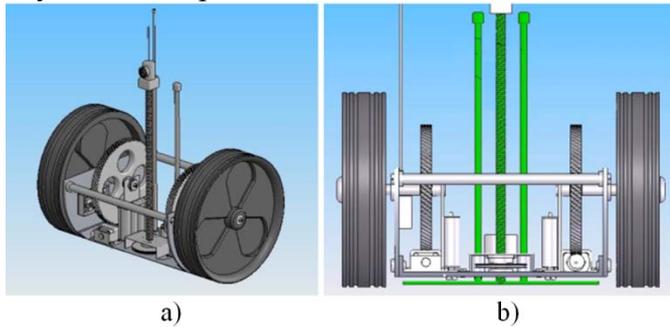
a) Isometric view of the “virtual” robot structure, b) Frontal view of the robot – lifting mechanism emphasized
